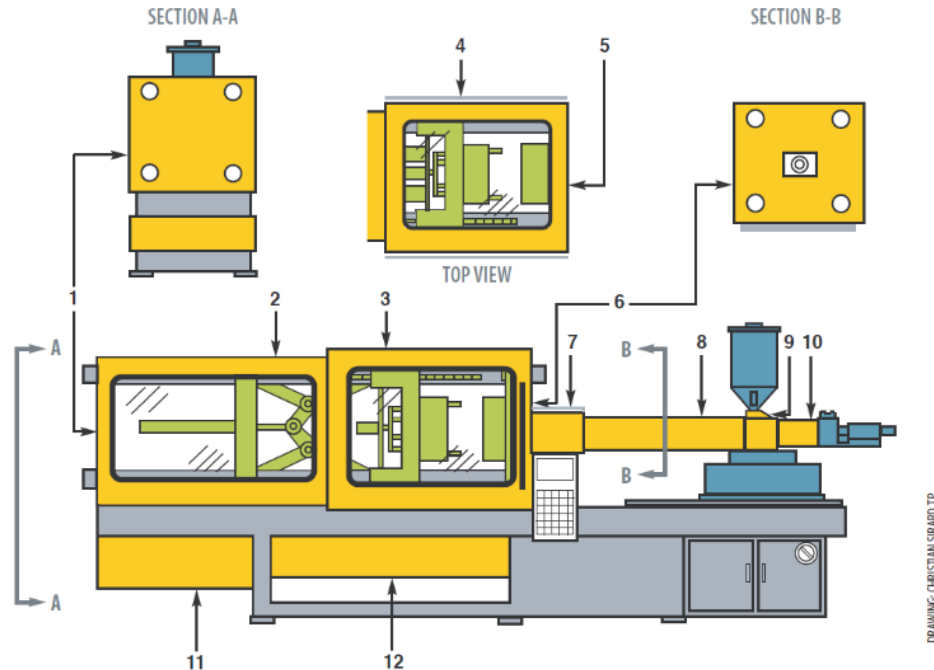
Guards on a horizontal plastic injection moulding machine [9].
